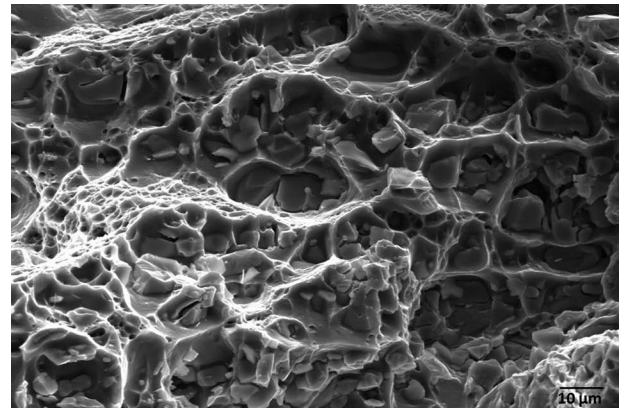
Another higher magnified fractograph of the fracture surface shown in Fig. 109. Note the presence of dimples associated with particles
